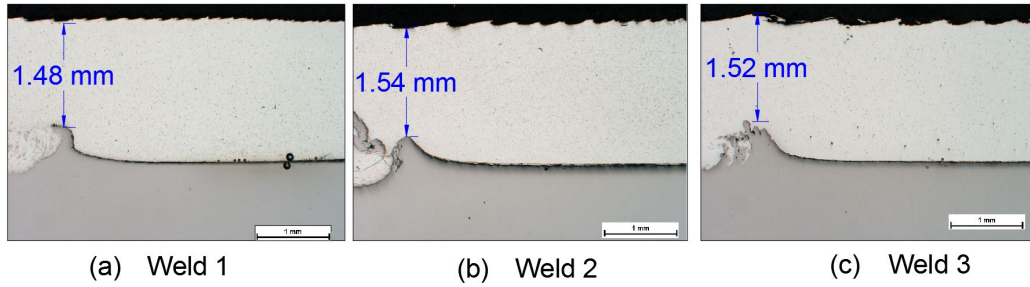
The effective thickness of aluminium alloy sheet of weld 1, weld 2 and weld 3.
